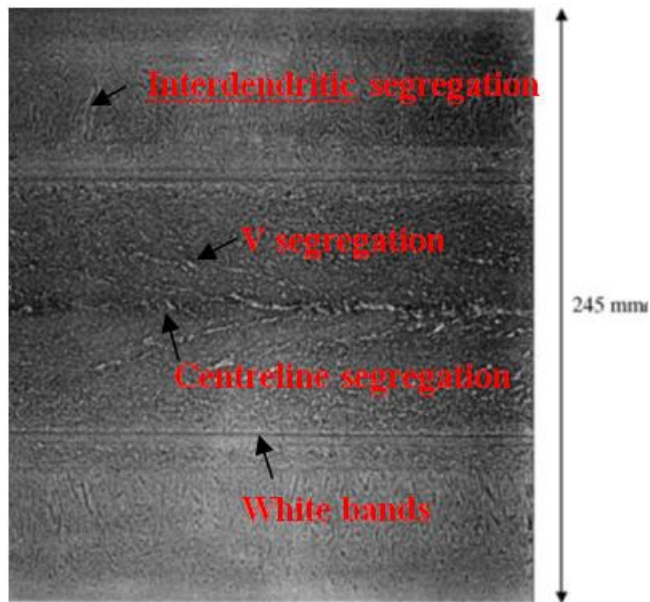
Longitudinal section of a continuously cast slab [71].
